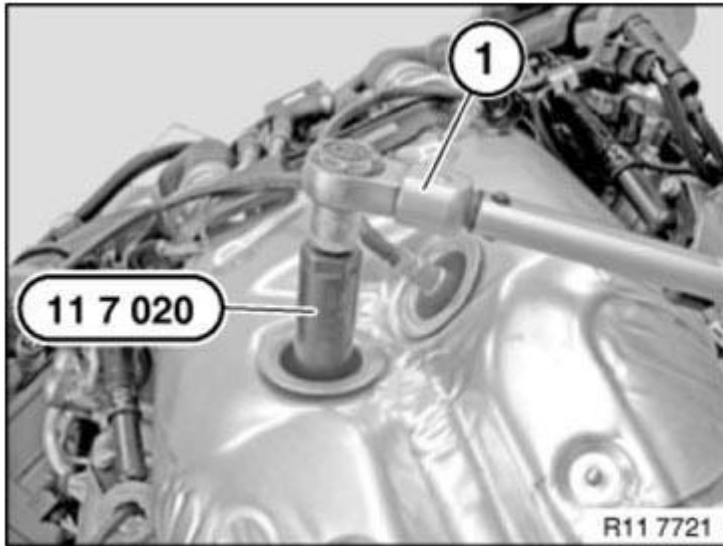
Securing Control Sensor Using Special Tool 11 7 020 And Torque Wrench
